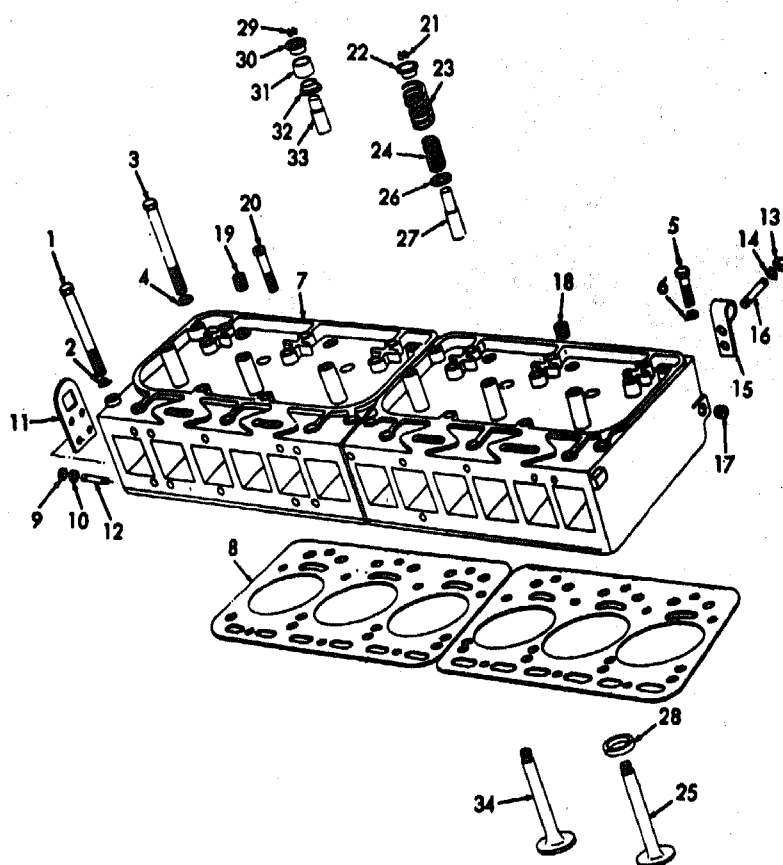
Carrier engine cylinder head and valves, removal and installation.
